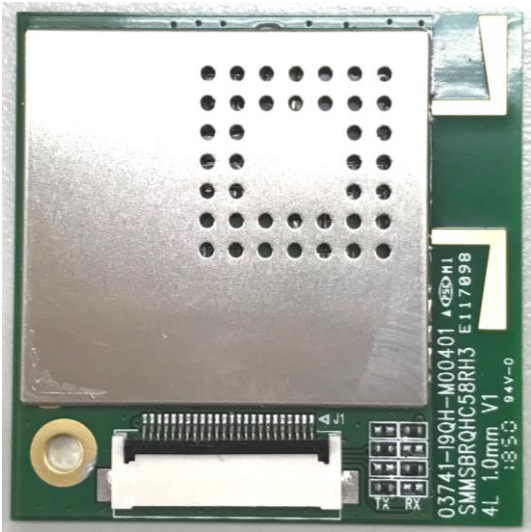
SY5-A24-F Module TX / RX with shielding case Top View
